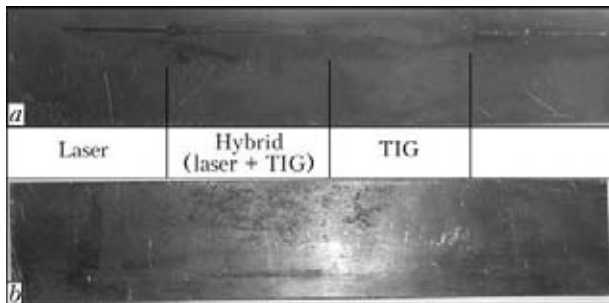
Top (a) and back (b) view of welded sample 1.2 mm thick ($P_L = 250\text{W}$, $I_a = 5\text{A}$, $v_w = 100\text{ mm/min}$, TIG torch is behind the laser beam)
